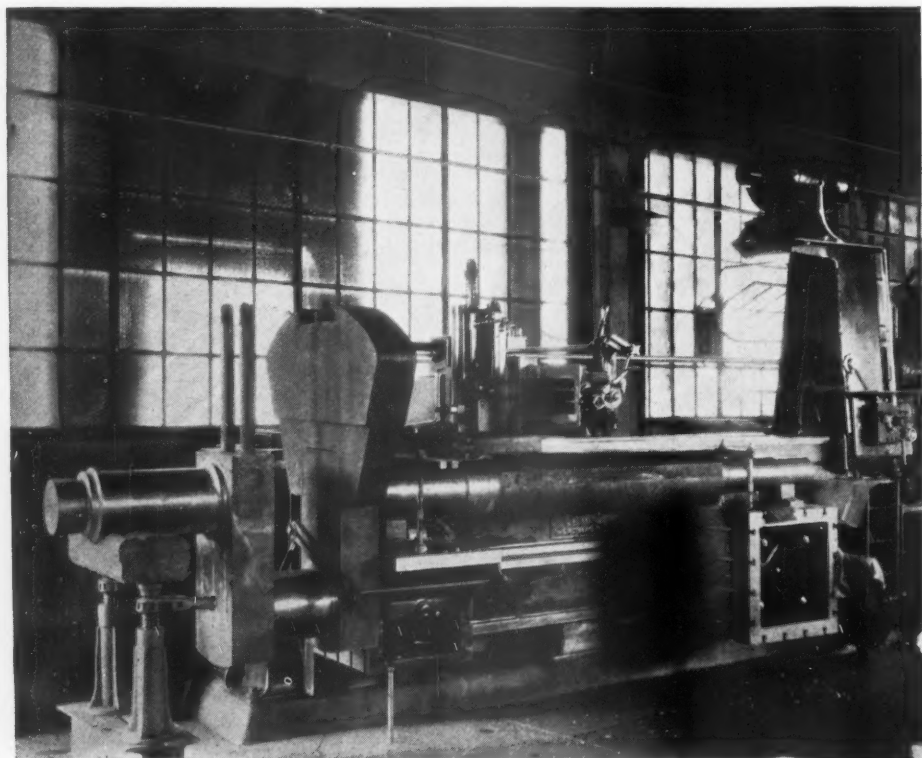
Shaper cutting keyway in a large shaft which had been repaired
